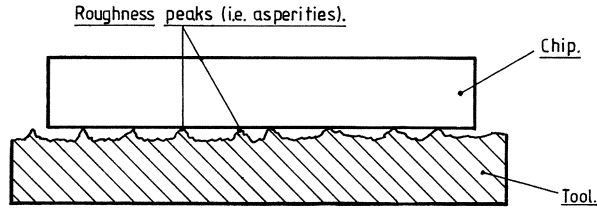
The friction between the chip and the tool. [Courtesy of Cimcool.]
